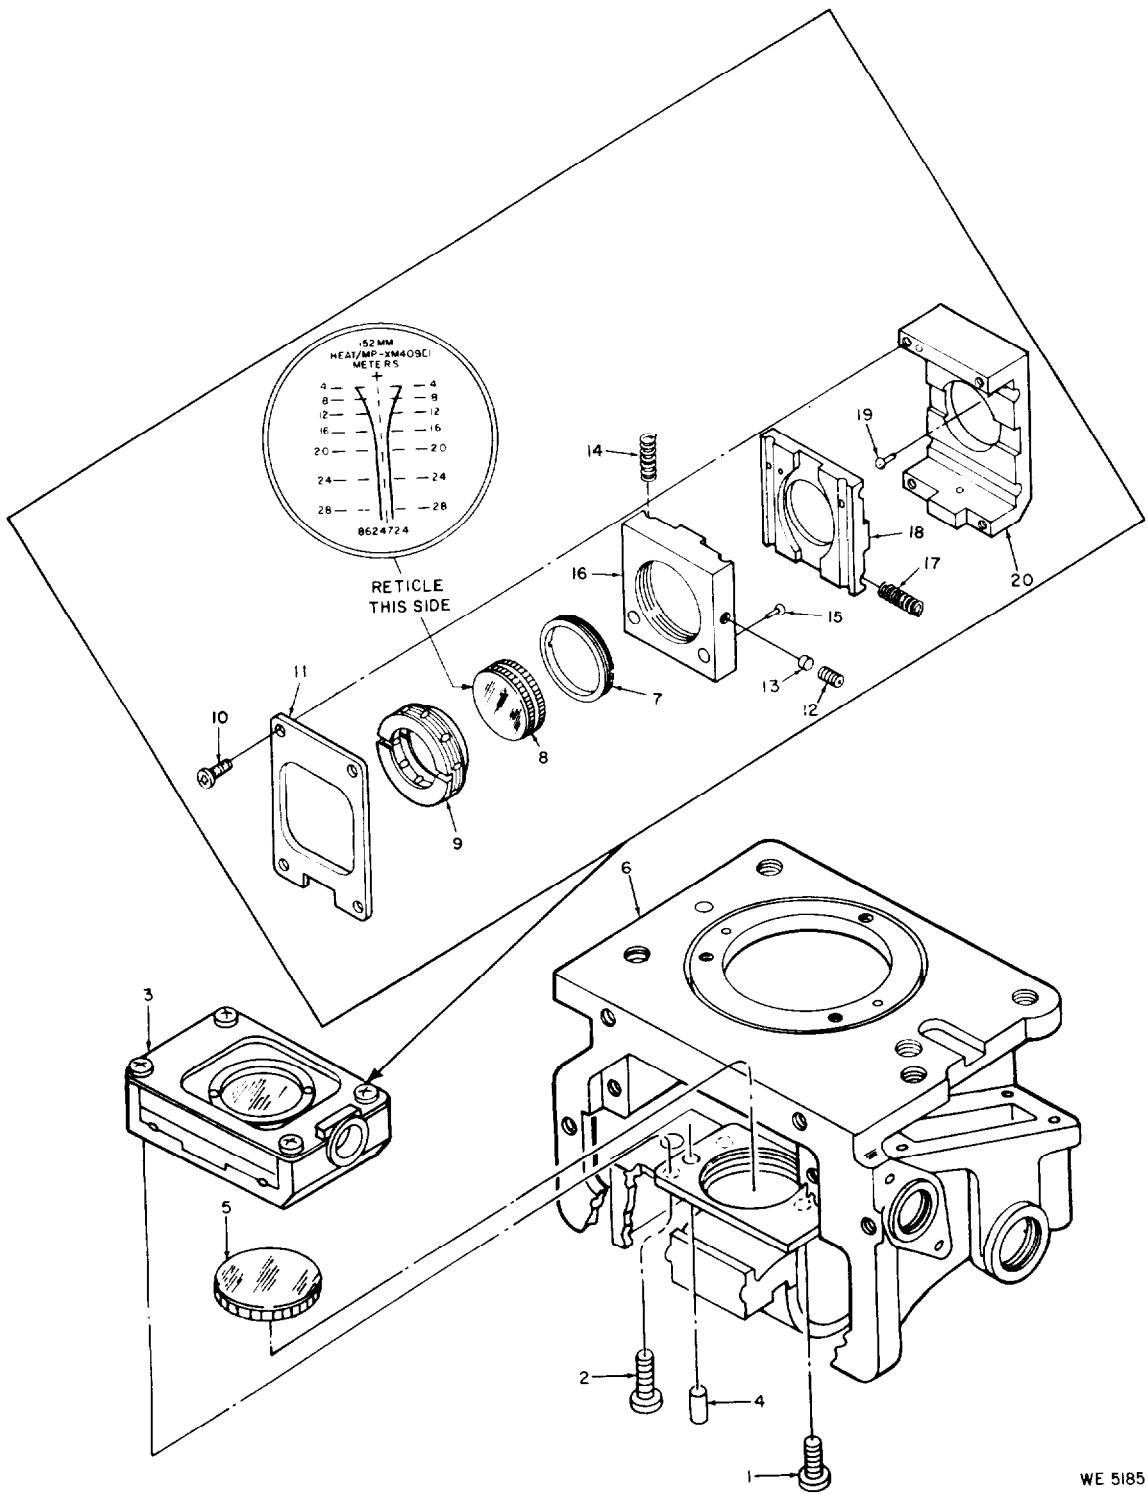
Reticle holder assembly (missile) 10553065--partial exploded view.
